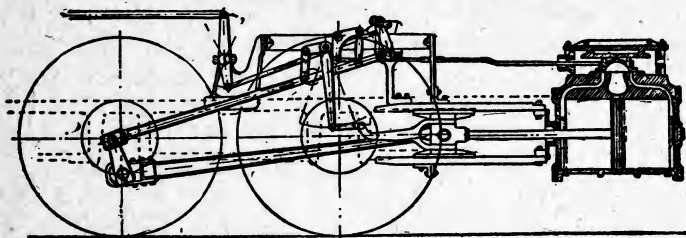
Baker-Pilliod Valve Gear, outside admission
